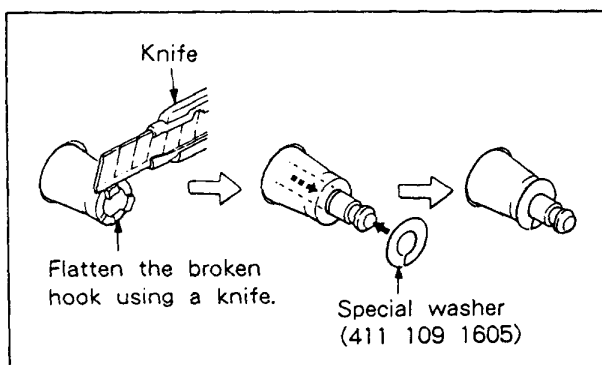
Method of Repairing the Bearing Section of the REV GUIDE LEVER ASSEMBLY
